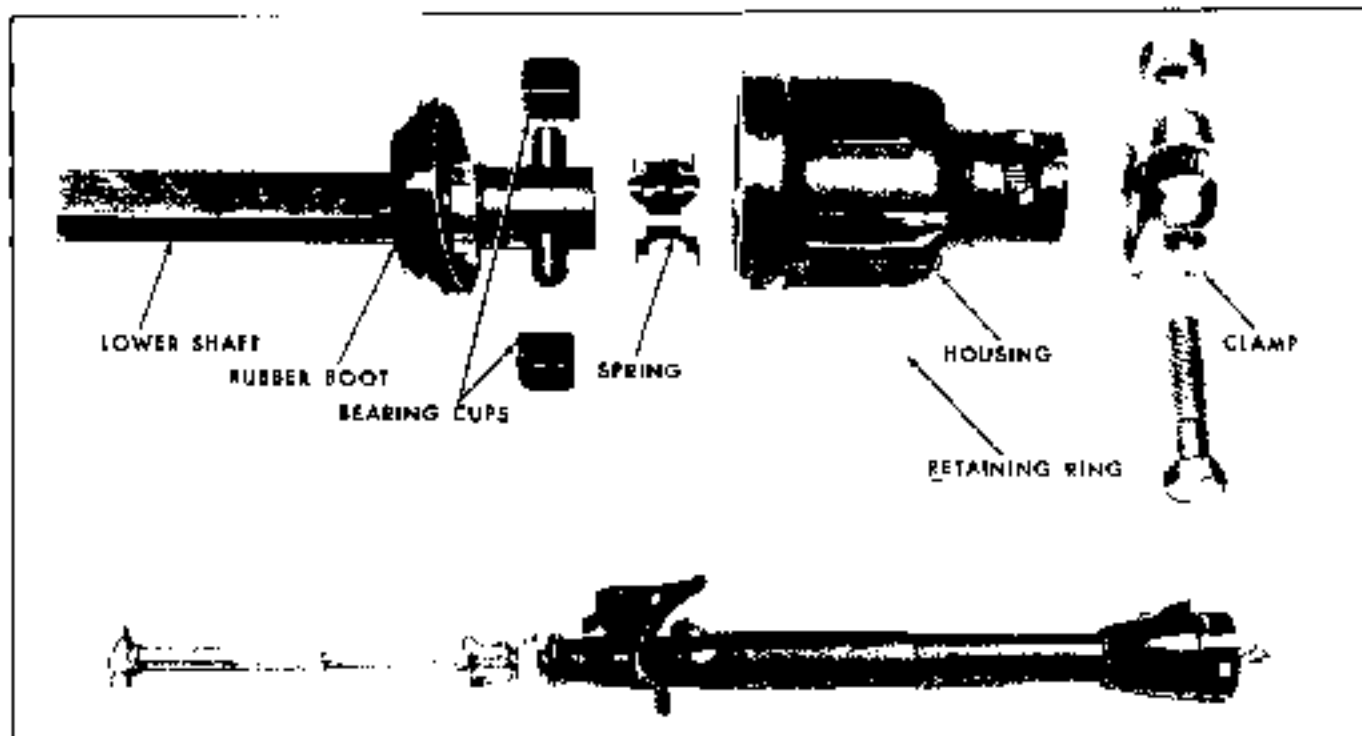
Exploded View of Pot Joint (Tempest Only)
